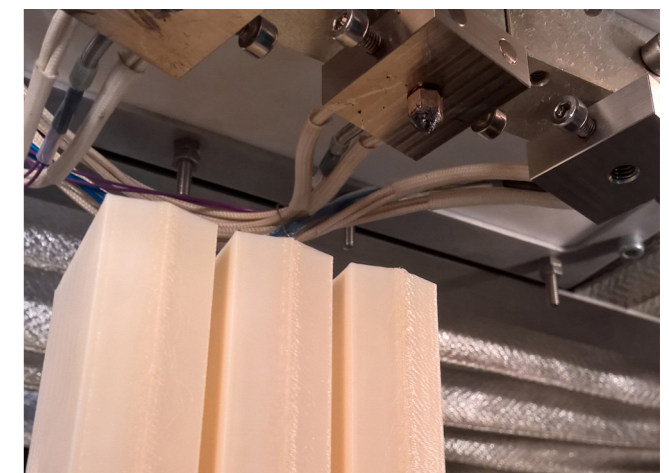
Custom built specimen in a build chamber of an FDM machine
